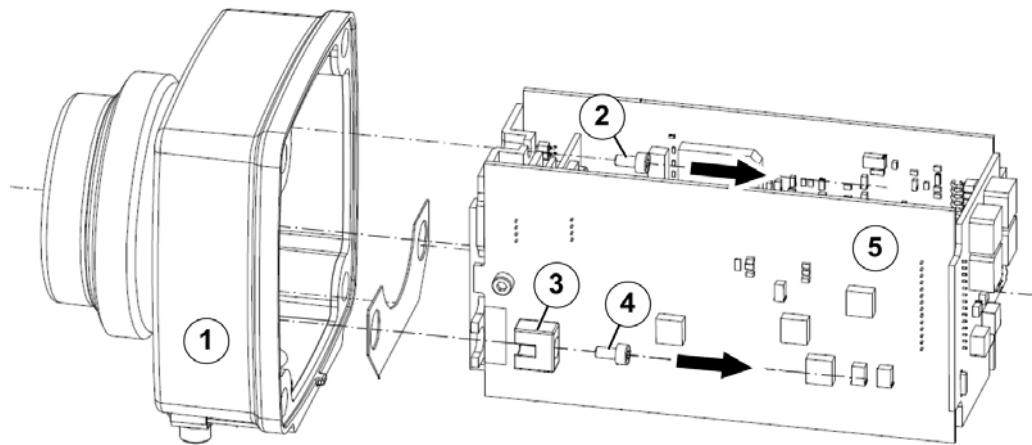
Disassemble the flame monitor (the model shown is the D-LX 110 in housing M5)
